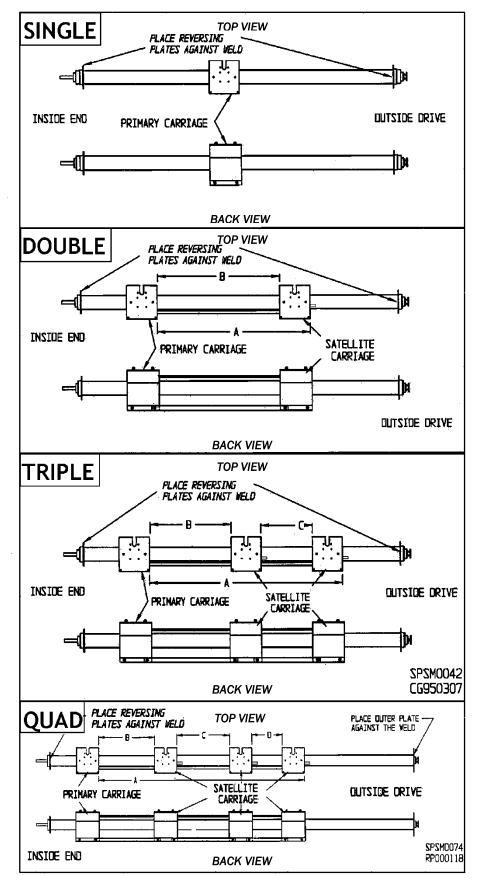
Tie bar & carriage placement for Fastir (See Table 7 for part #s & dimensions)
